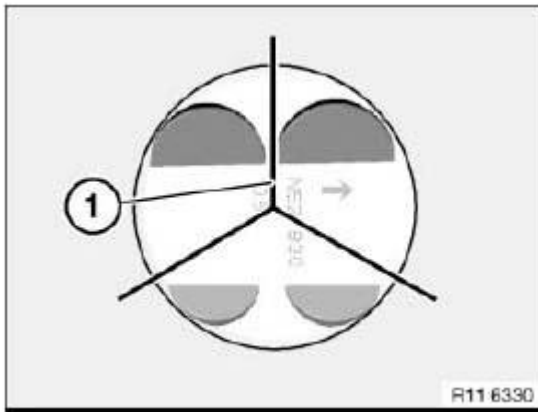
Identifying Offset Contact Points Of Piston Rings
